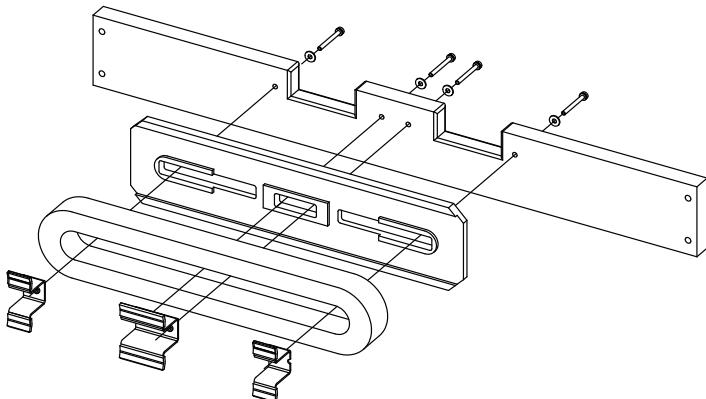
Drive Common Mode Core Options 5 and 6 (30339-319-01 and 30339-320-01) Exploded View
